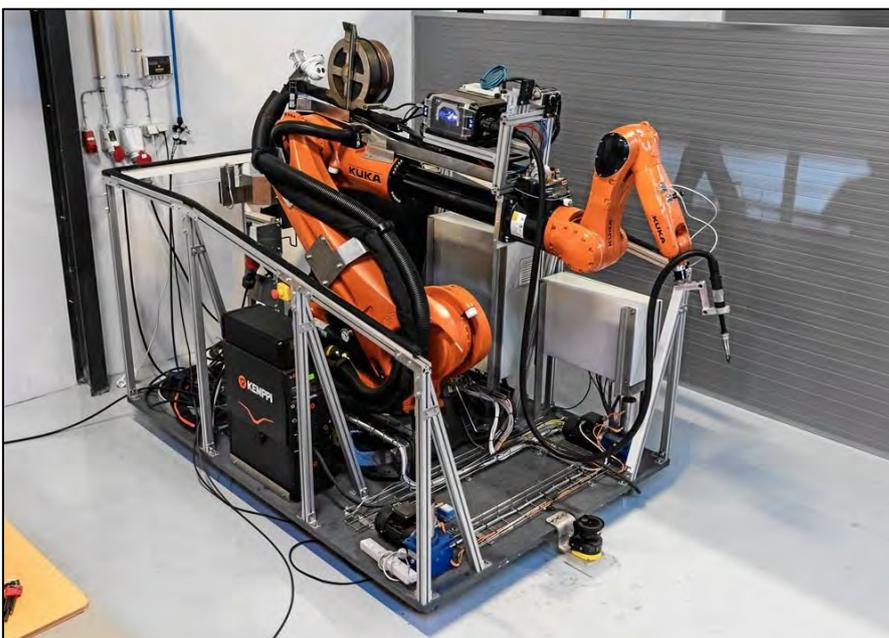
Mobile robotic welding unit (Inrotech)
